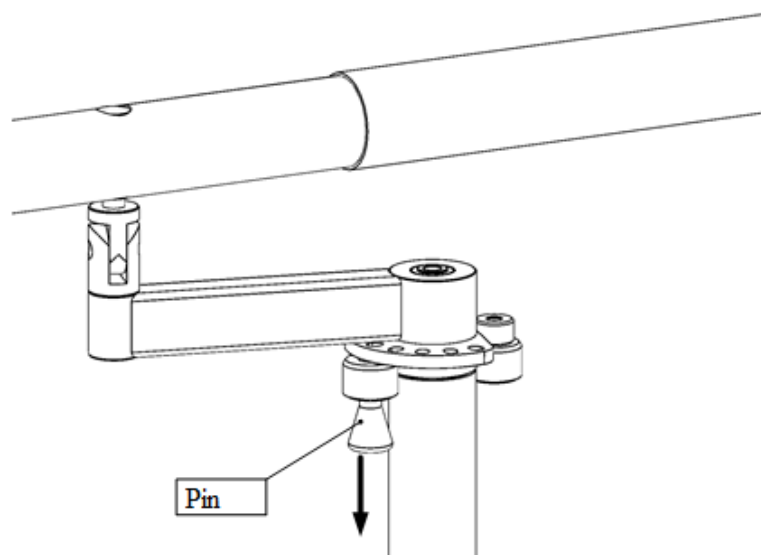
Location of adjustable handrail fasteners for width adjustment
